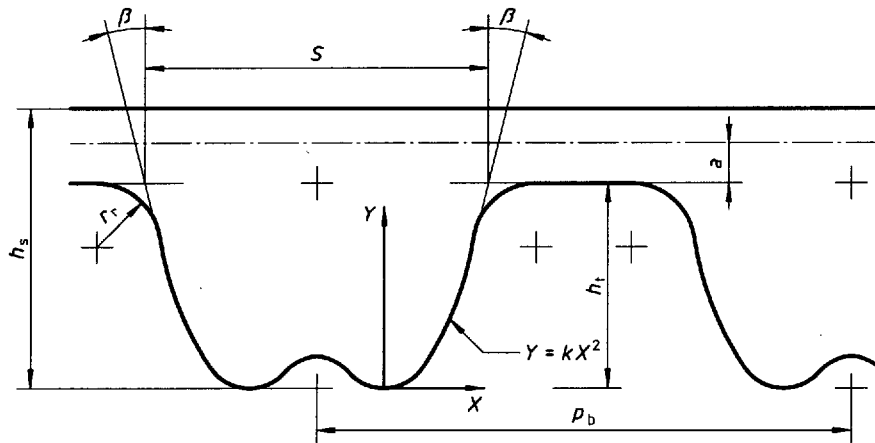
Nominal tooth dimensions (profile) for types ZR and YR
